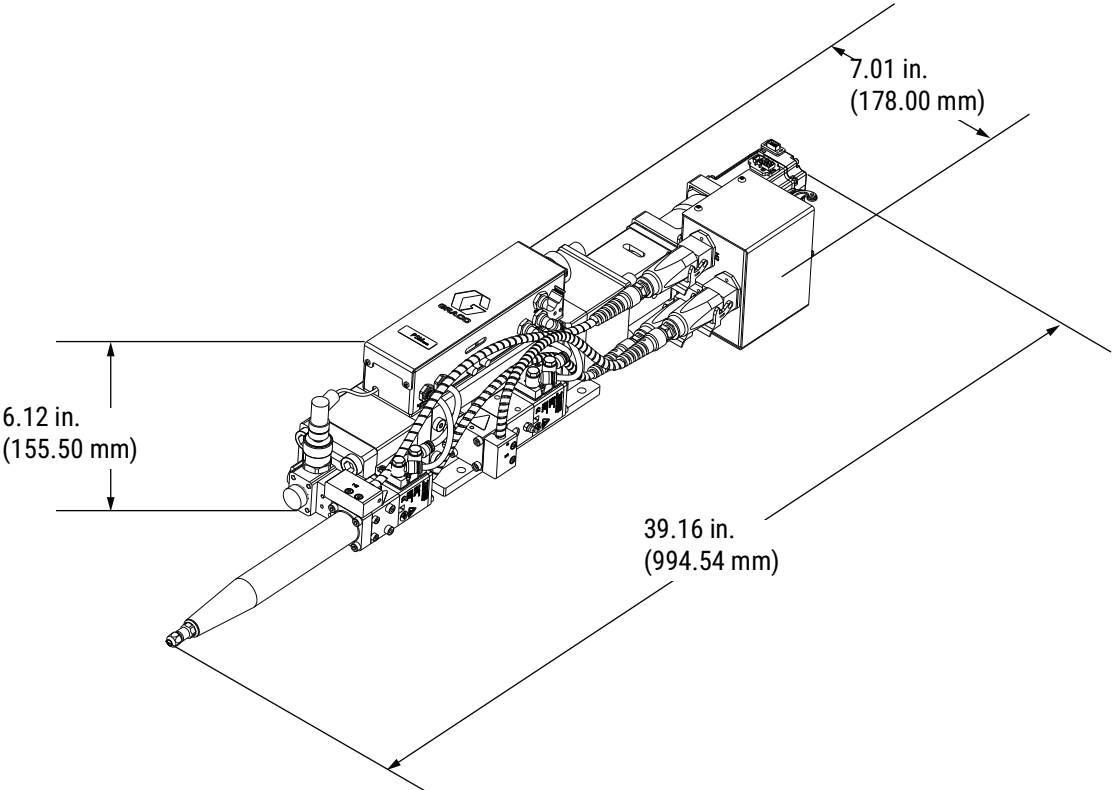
PSM Warm Melt Metering Unit Dimensions, 100 cc
